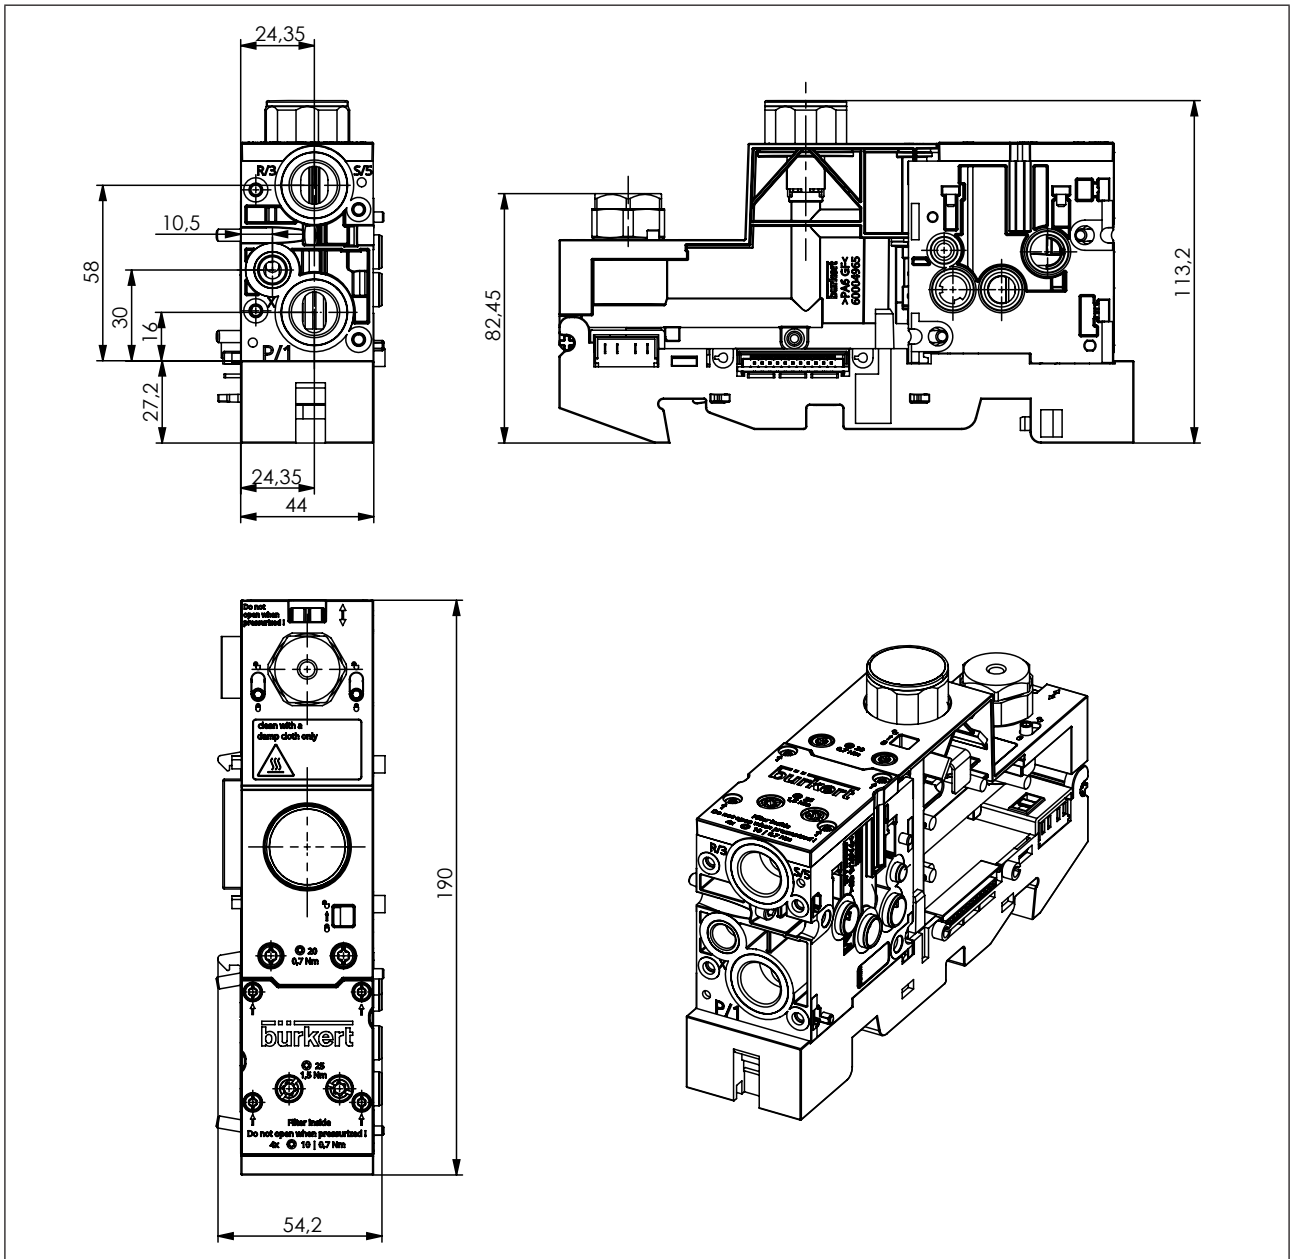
Dimensions [mm] connection segment valve block AirLINE Ex REV.2
